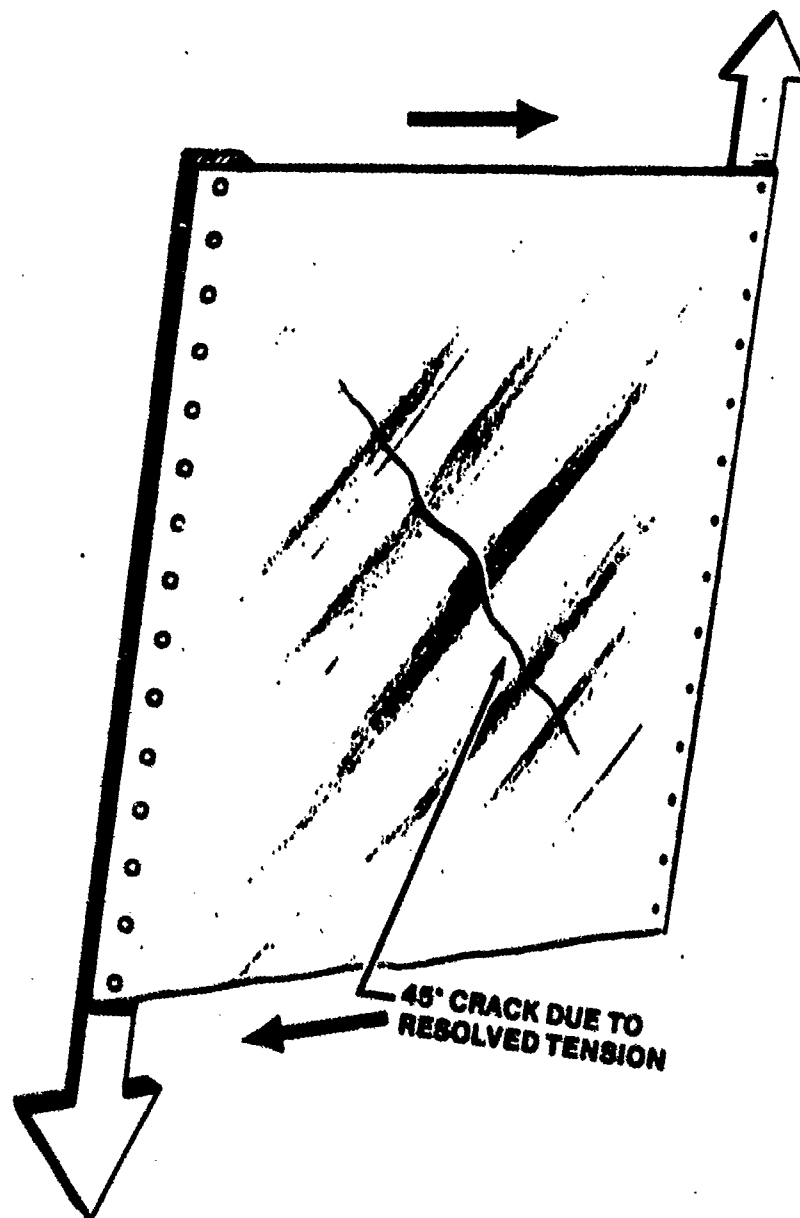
SHEAR IN PANELS TENSION TYPE FAILURE
